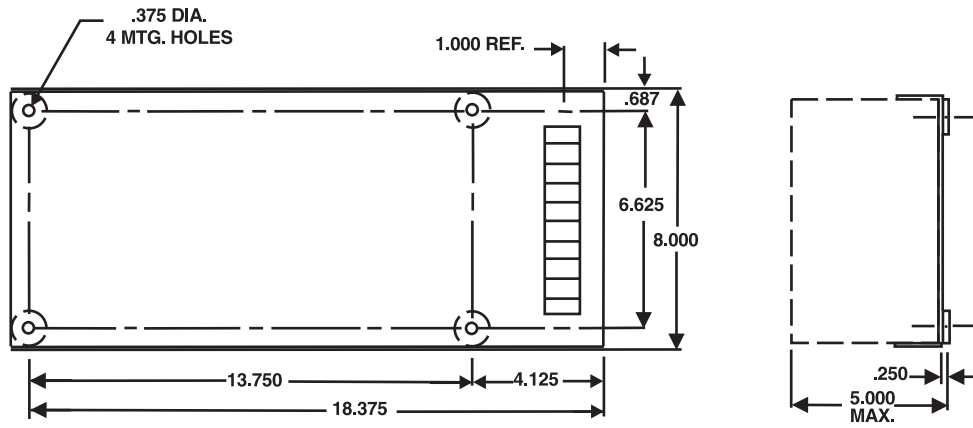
Outline Drawing - Reservoir Assembly - SBO 200 Series
